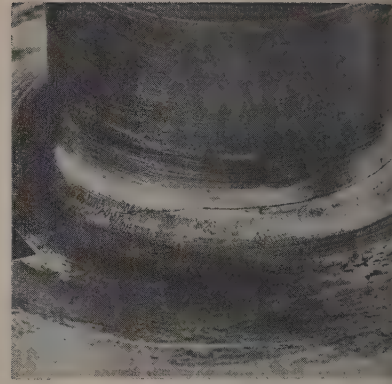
Fatigue crack in the forged-steel shaft of a punch press
